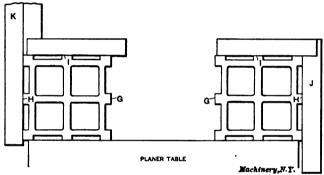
Method of Testing Accuracy of "Planing Square" when using the Side-heads
